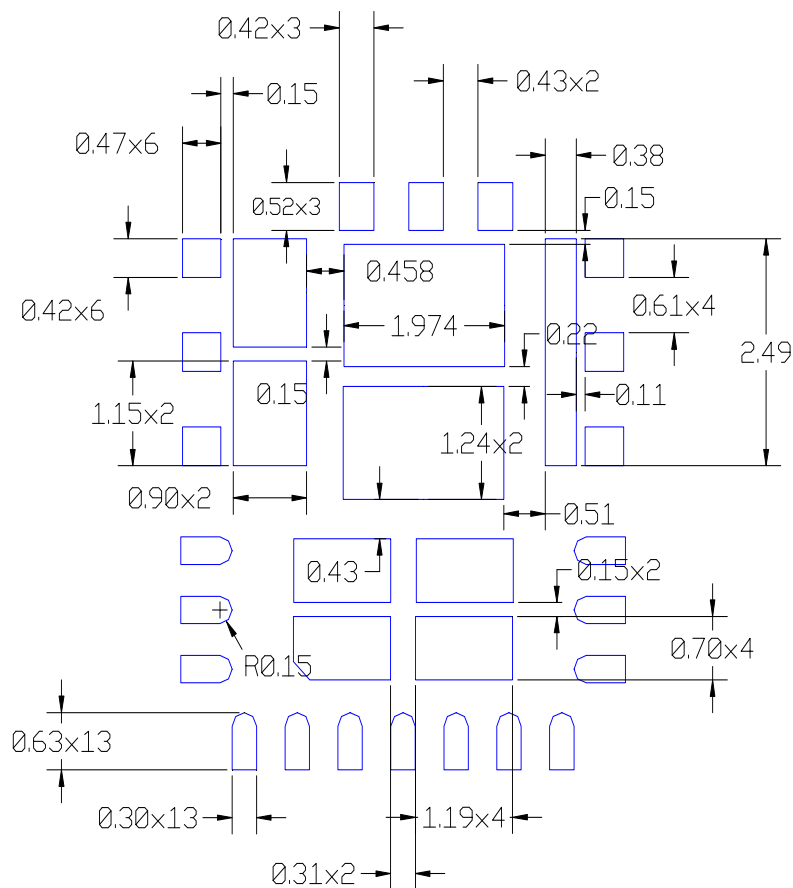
Stencil Pad Spacing (all dimensions in mm)
